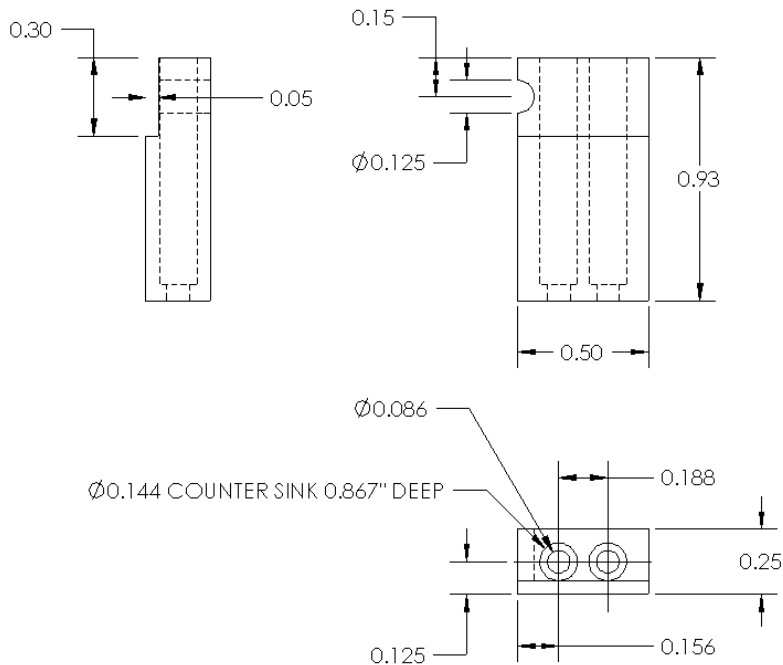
Dimensions of the second of two outer attachment blocks of the shear strain extensometer. All dimensions are in inches.
